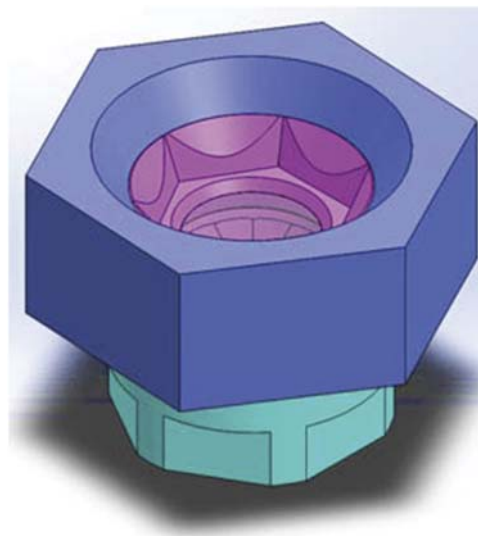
The CAD rendered view of the 3D-DAC assembly.
